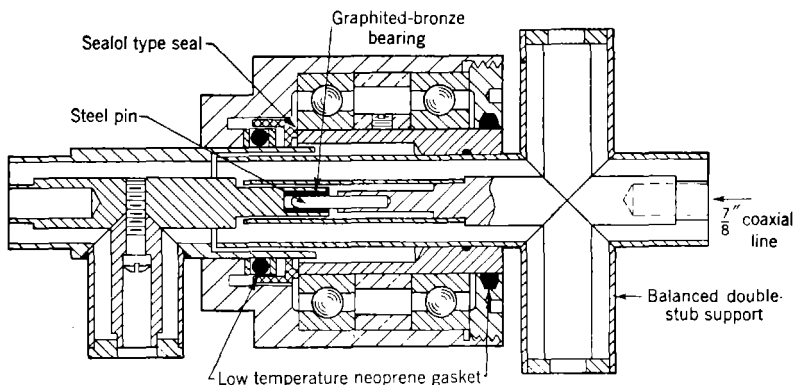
High-speed pressurized coaxial rotary joint for 10 cm.
